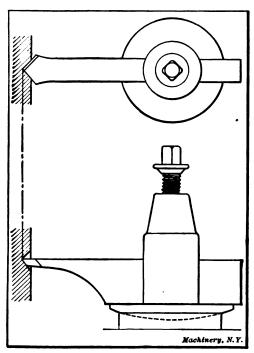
Special Tool which Forms a Center for Starting the Drill
